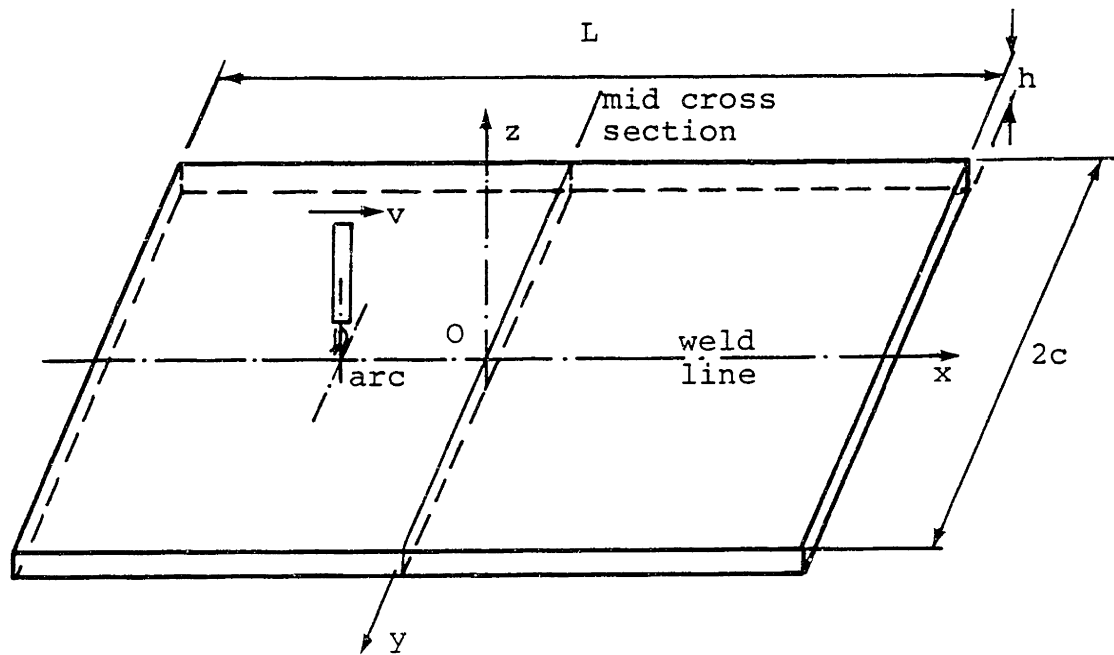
Weldment configuration (Butt welding of plates)
